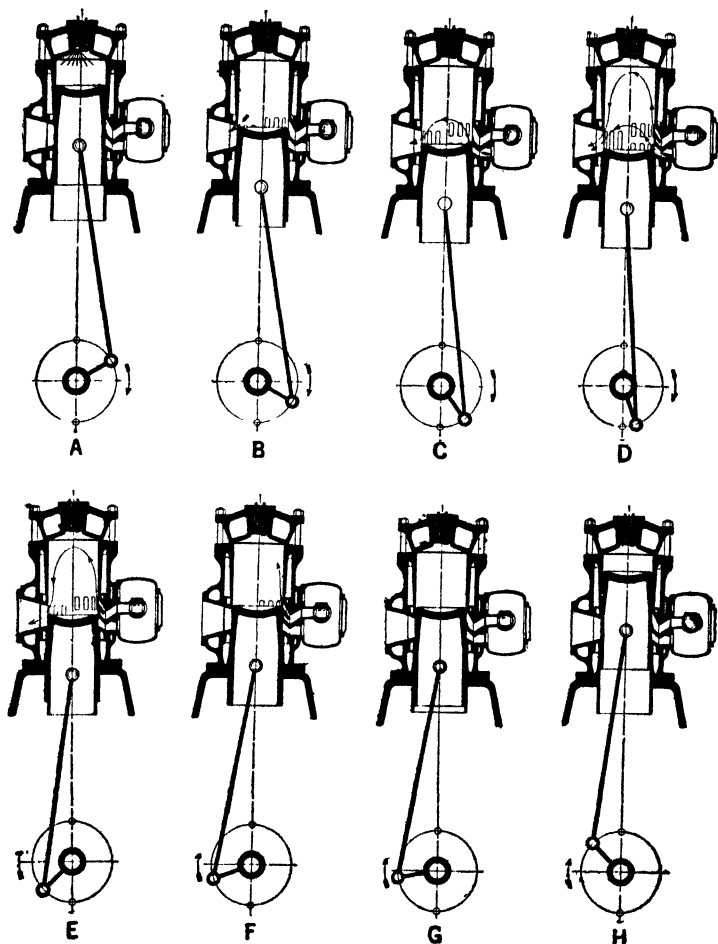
Valve Events of Busch-Sulzer, Valve Controlled, Port Scavenging, 2-Cycle Diesel Engine
